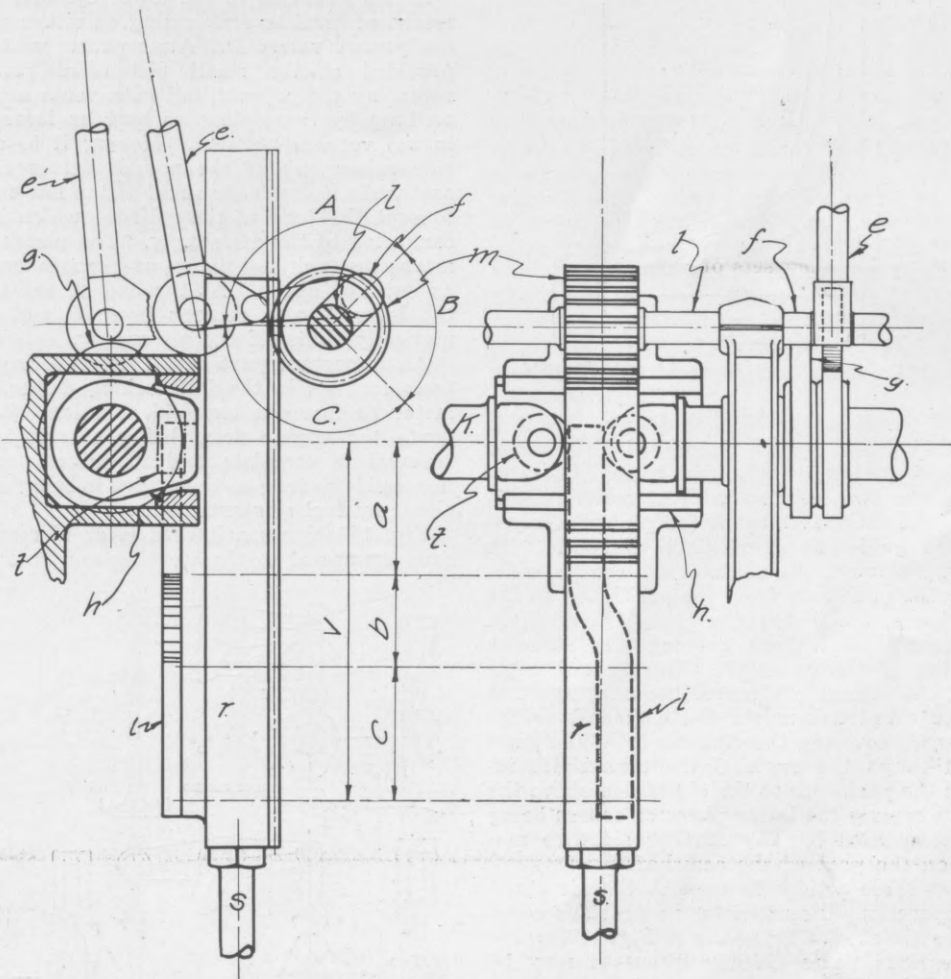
Sketch of details of reversing gear mechanism of the engine shown in Fig 156
